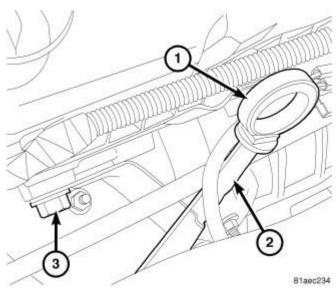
OIL INDICATOR TUBE Courtesy of CHRYSLER LLC
